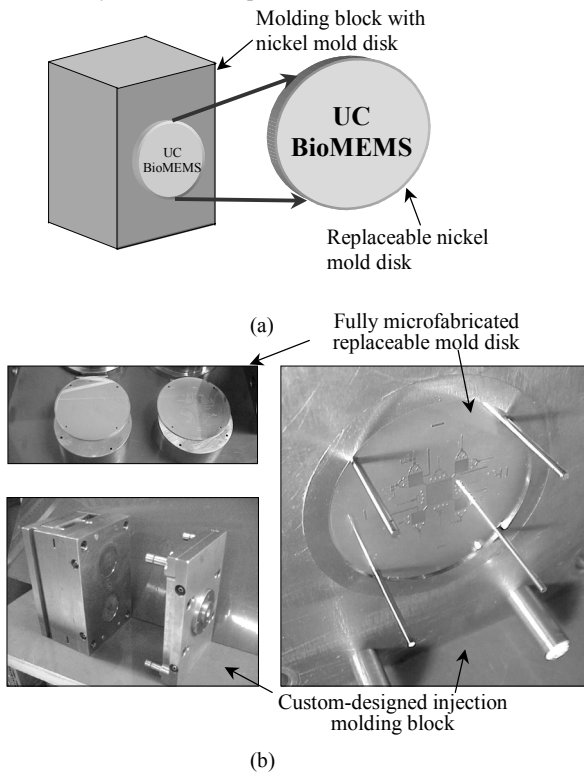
Injection molding block: (a) schematic of the molding block with the replaceable mold disk and (b) photographs of the custom designed molding block with the replaceable Ni mold disk and the fabricated microstructures in the Ni mold disk insert.
